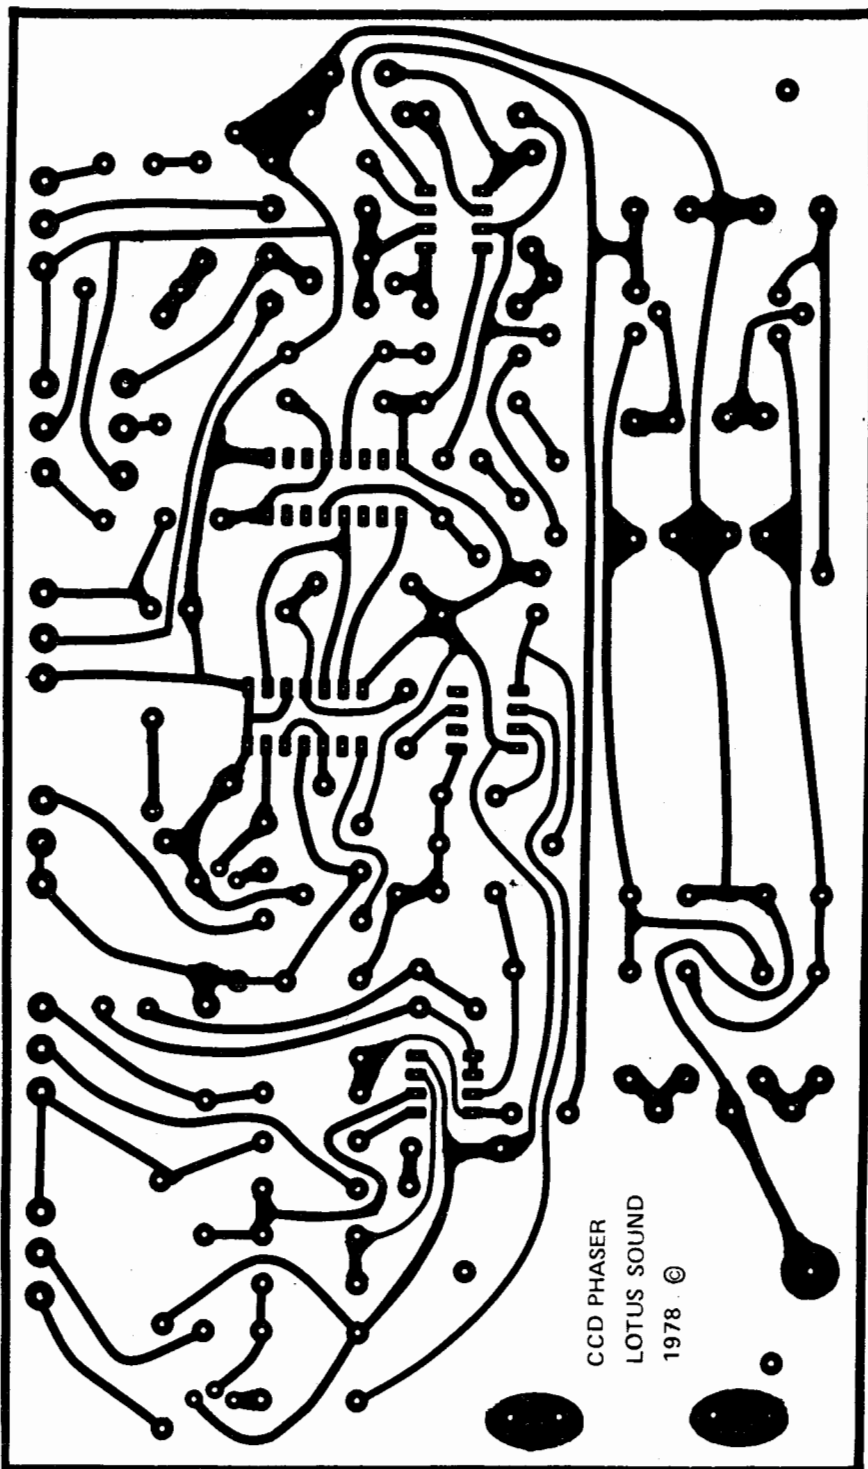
Full size PCB layout for the phaser (195mm x 115mm).
